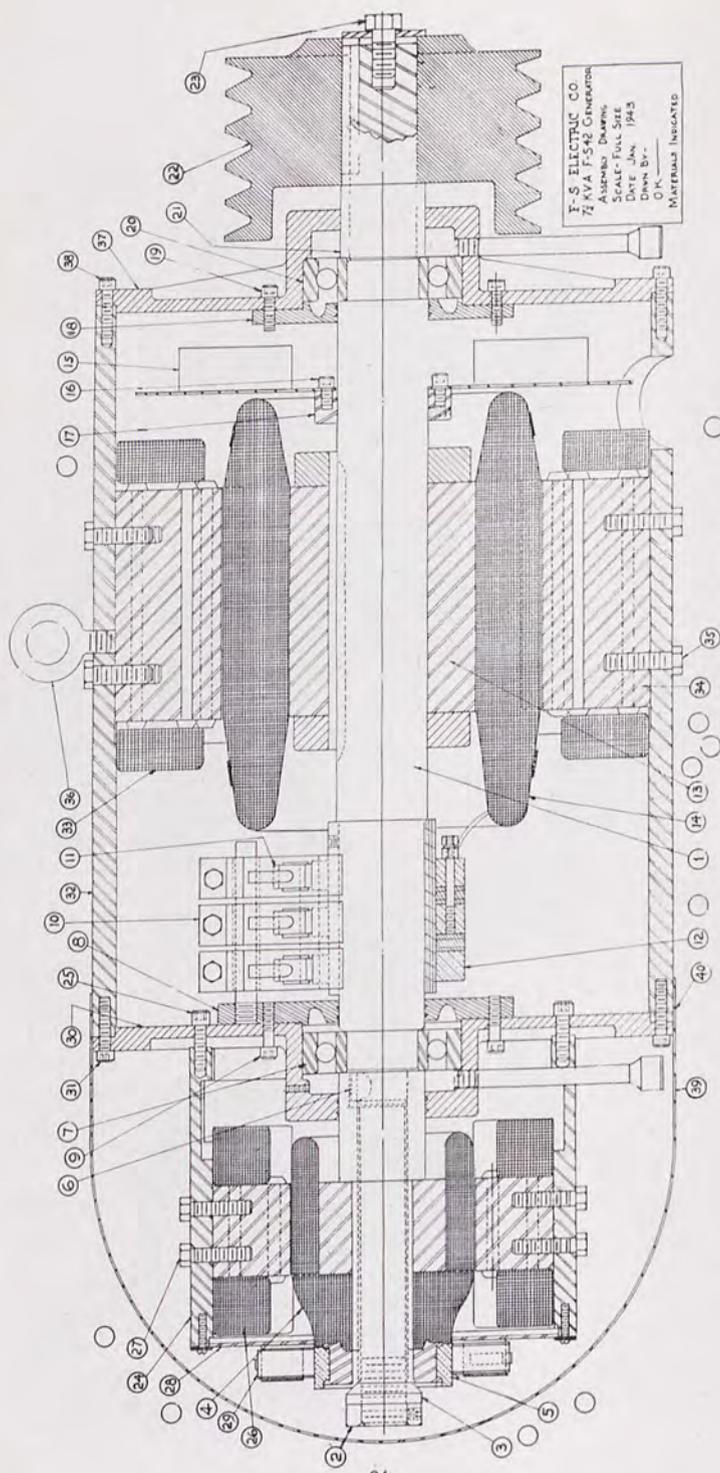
ALTERNATOR FRAME ASSEMBLIES
